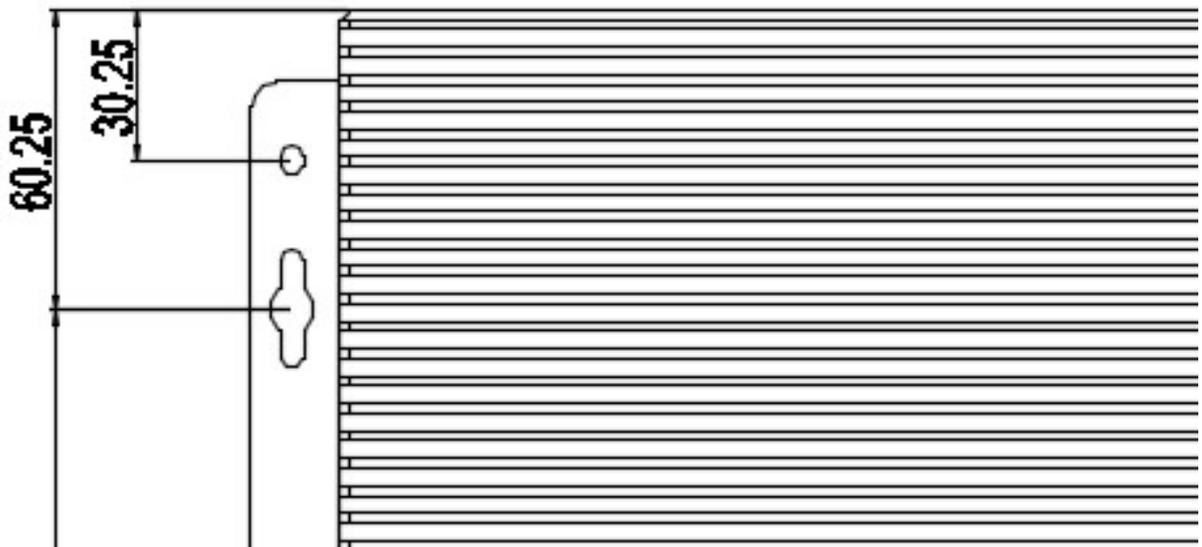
NewPre3101 installation dimension drawing (Unit: mm)
